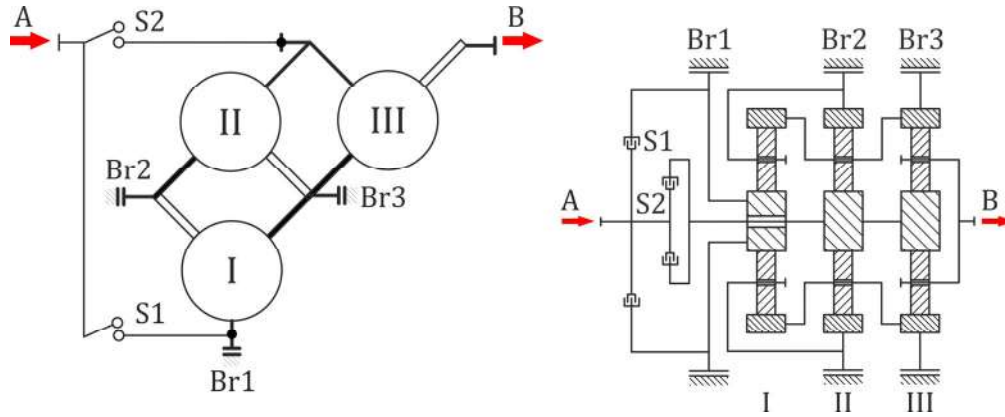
Structural (left) and kinematic scheme (right) of the three-carrier, six-speed ZF 4HP500 gearbox
